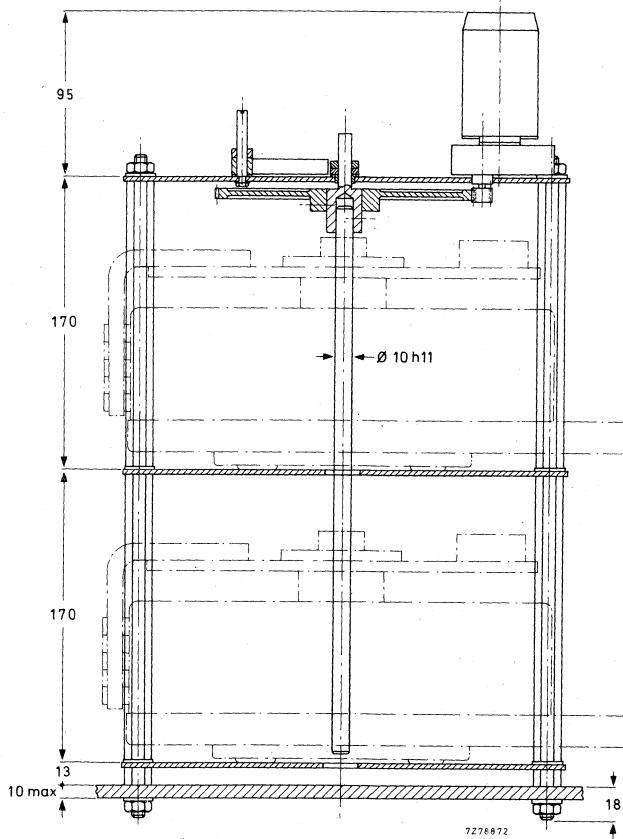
Motor drive for two ganged transformers. For connection of top-plate parts, see Fig. 27.
